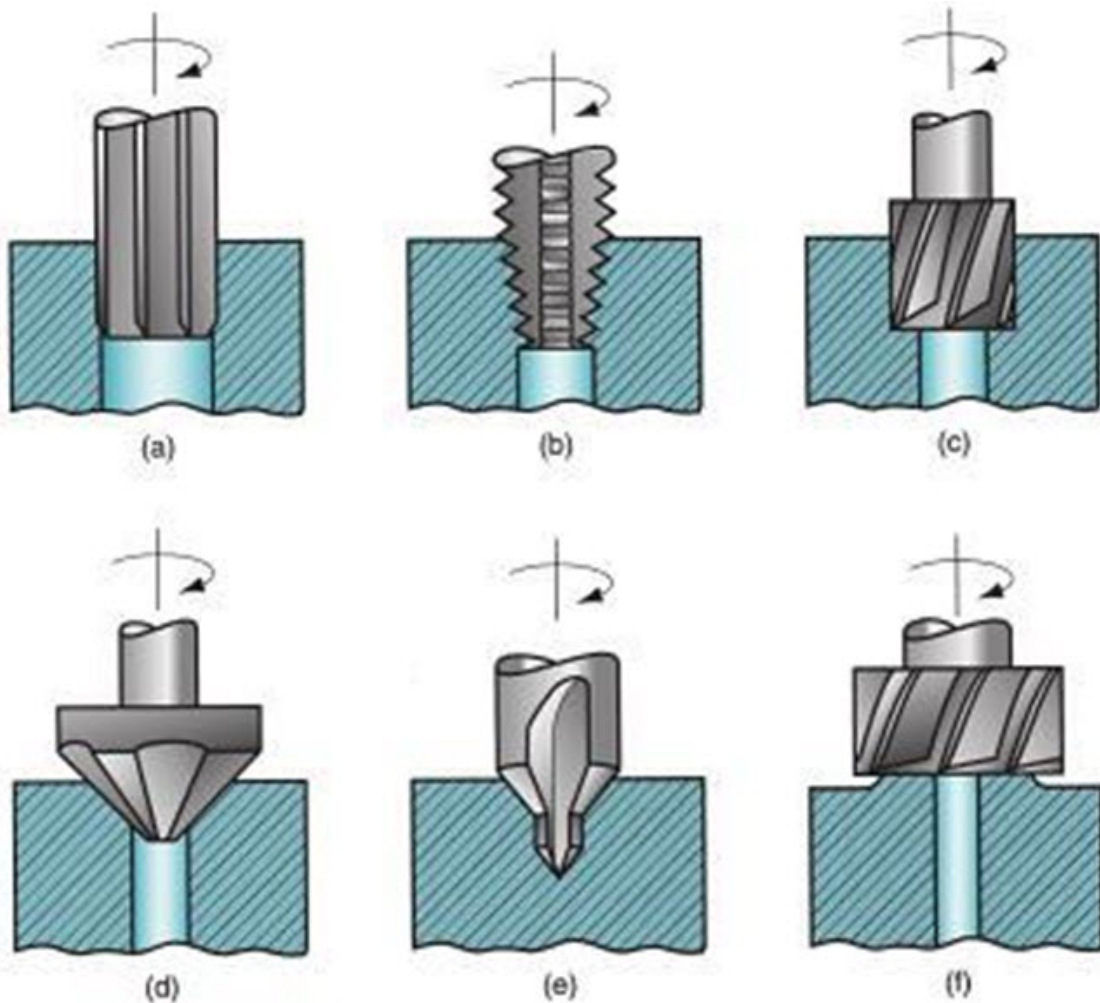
Machining operations related to drilling: (a) reaming, (b) tapping, (c)
